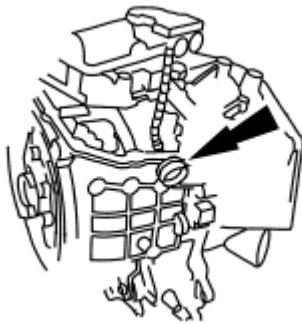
Solenoid Body Electrical Connector O-Ring Seal
